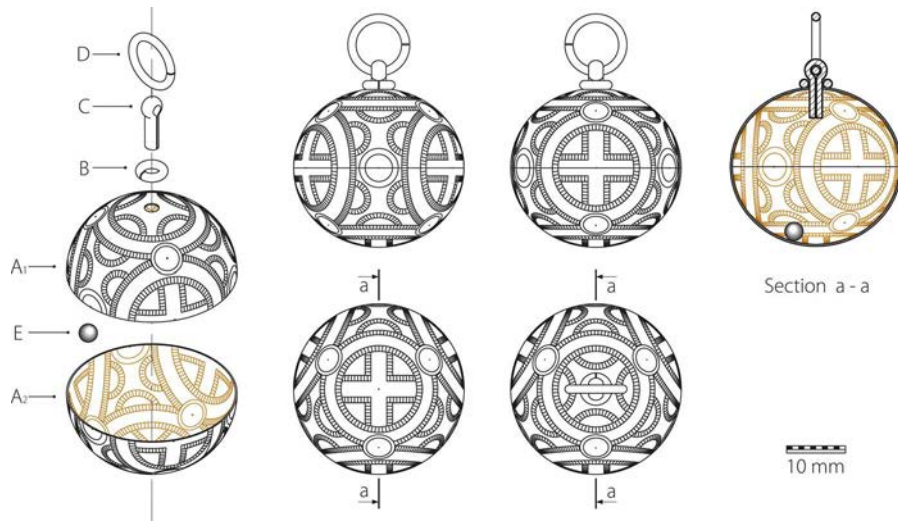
Gombik 104-4: exploded view of the different components: A₁ upper hemisphere; A₂ lower hemisphere; B ring; C clamp; D loop; E pellet (drawing G. Plítková).
